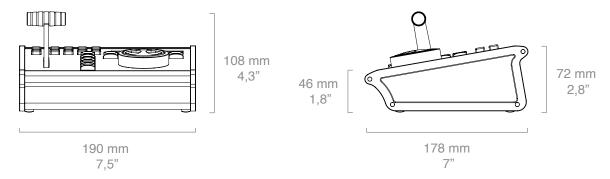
Technical drawing of Time Spin with key dimensions and layout details.
